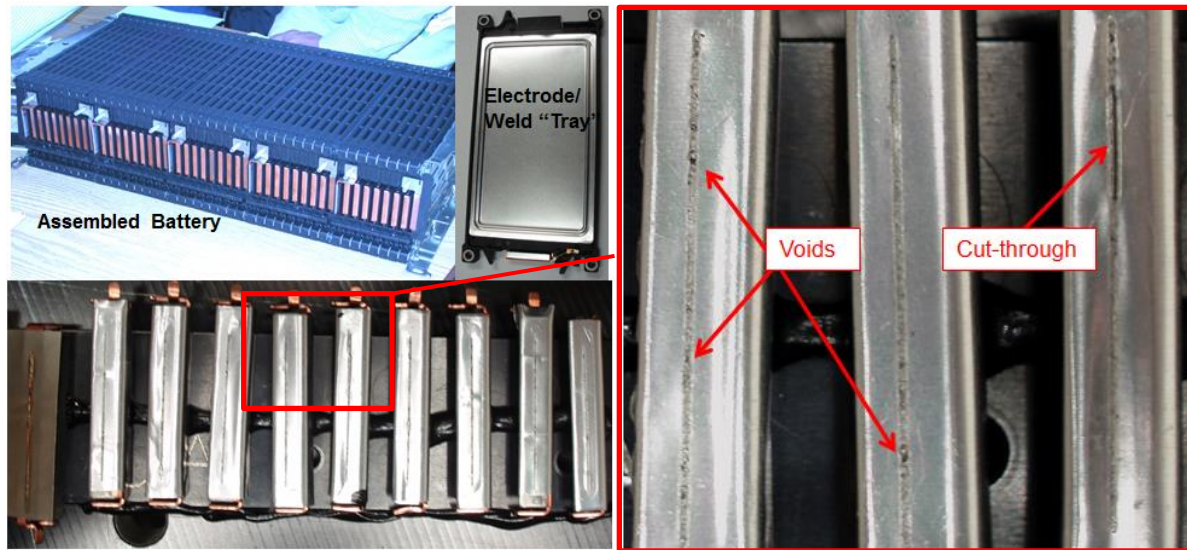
Illustration of laser weld defects in an assembled battery (bead width  $\leq 2\text{mm}$ )
